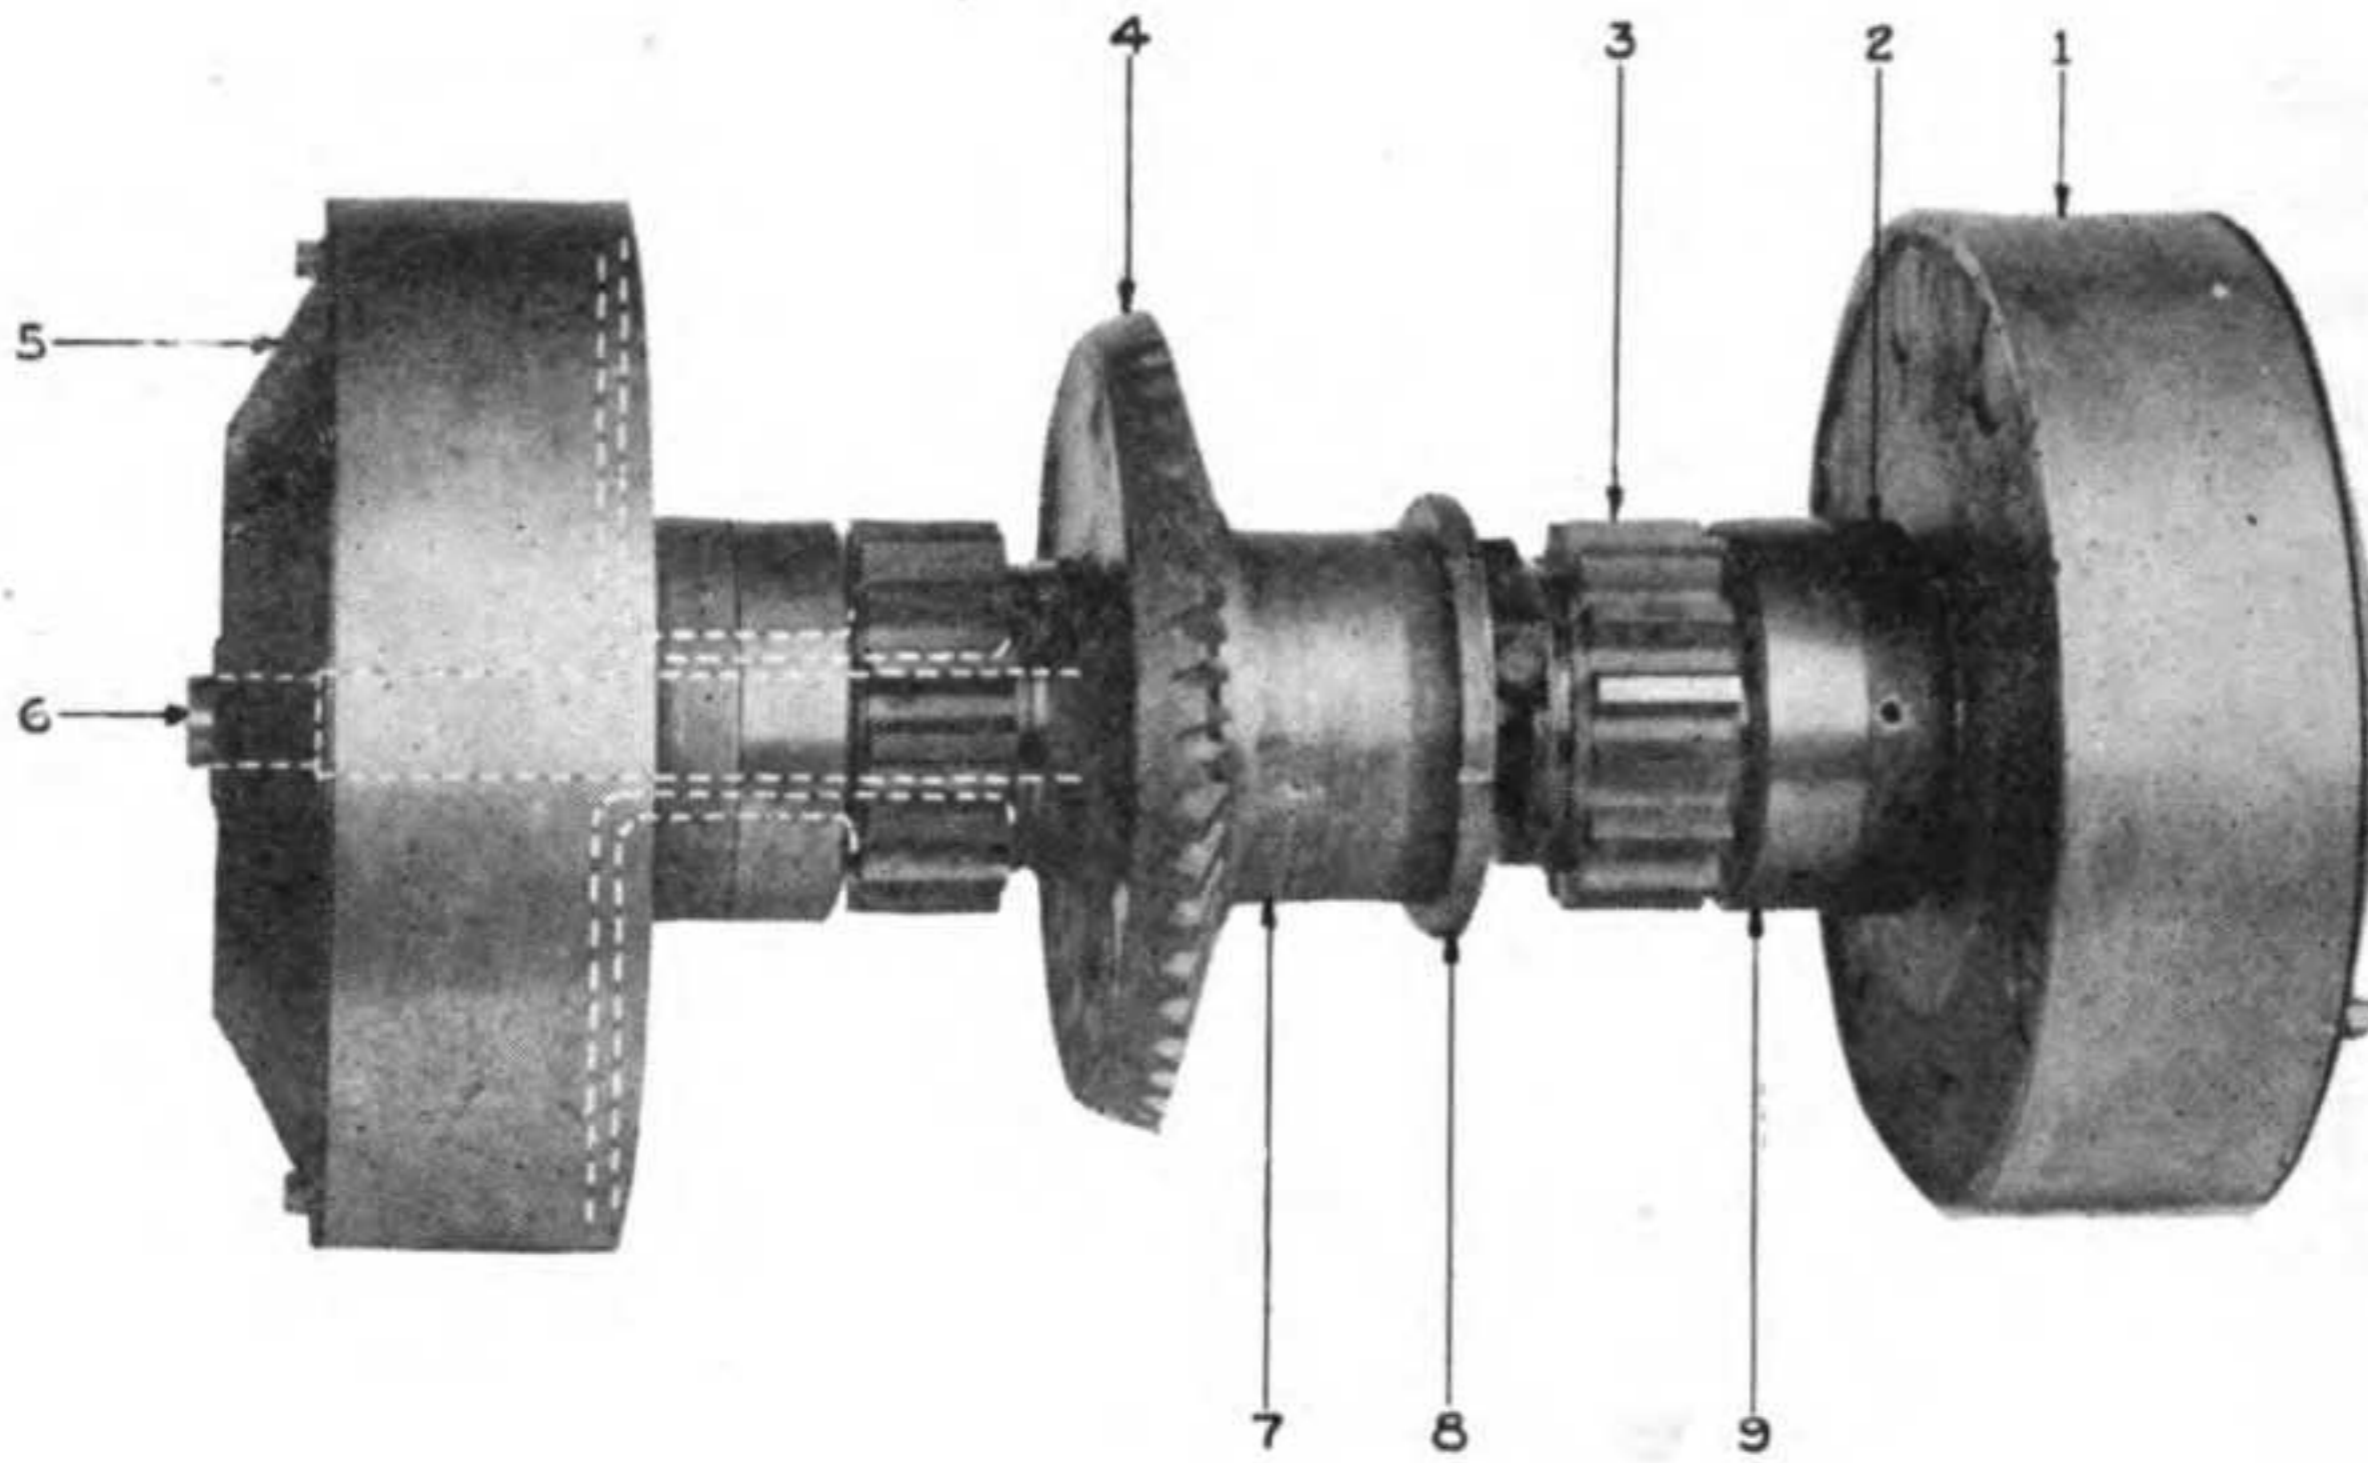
STEERING CLUTCH SHAFT ASSEMBLY
